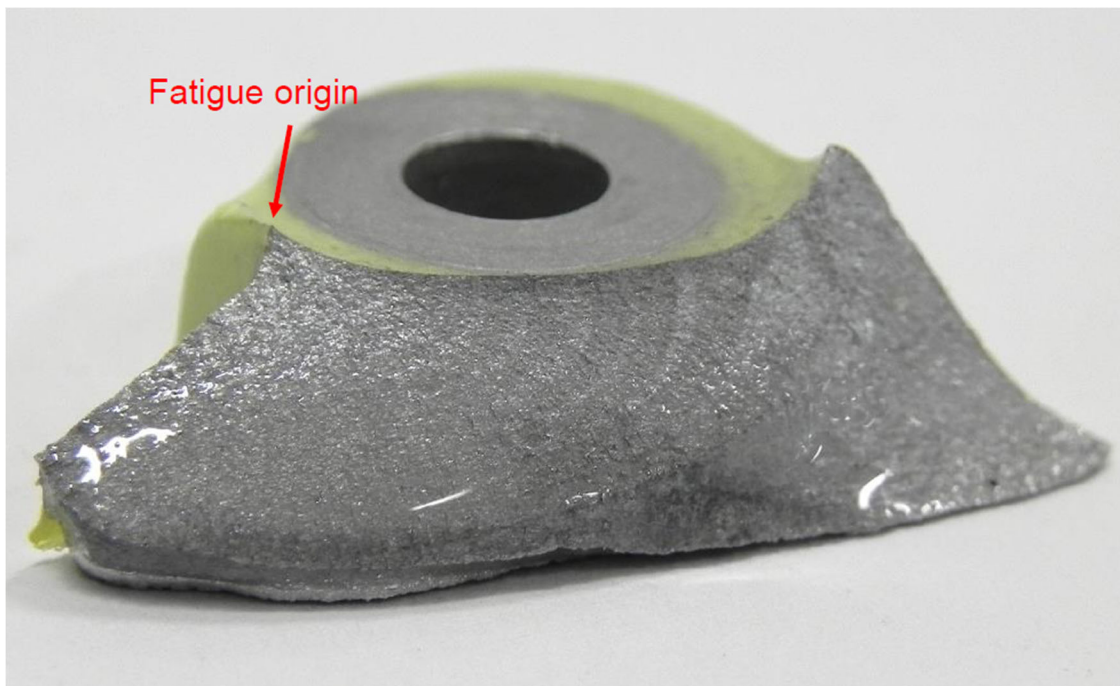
Fatigue cracking on the forward-left lug of the pedal damper check valve housing. (Image courtesy of Sikorsky)
